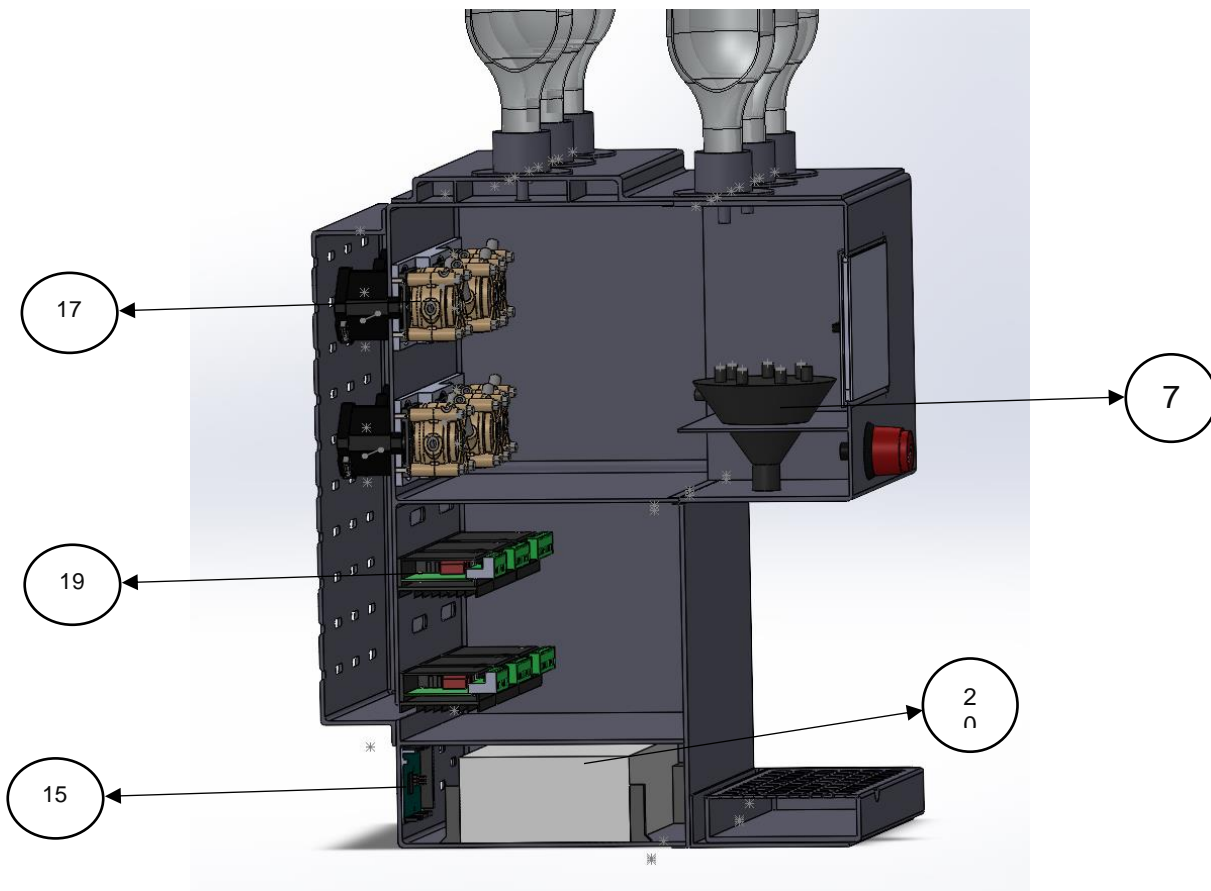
The section view for the complete assembly with major subcomponents.
